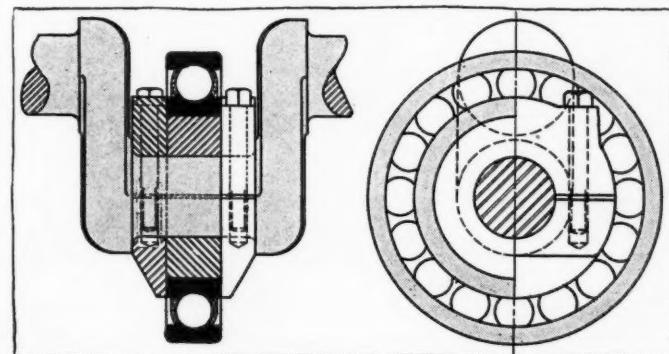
Detail of center ball-bearing mounting for a three-bearing crankshaft
